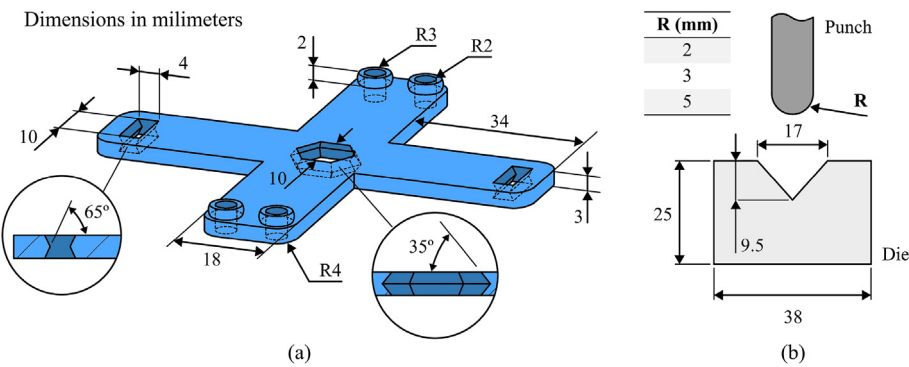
(a) Geometry of the flat cross-shaped specimens and final three-dimensional double U-shaped parts. (b) Schematic representation of the punch and die tool set used in the bending operations.
